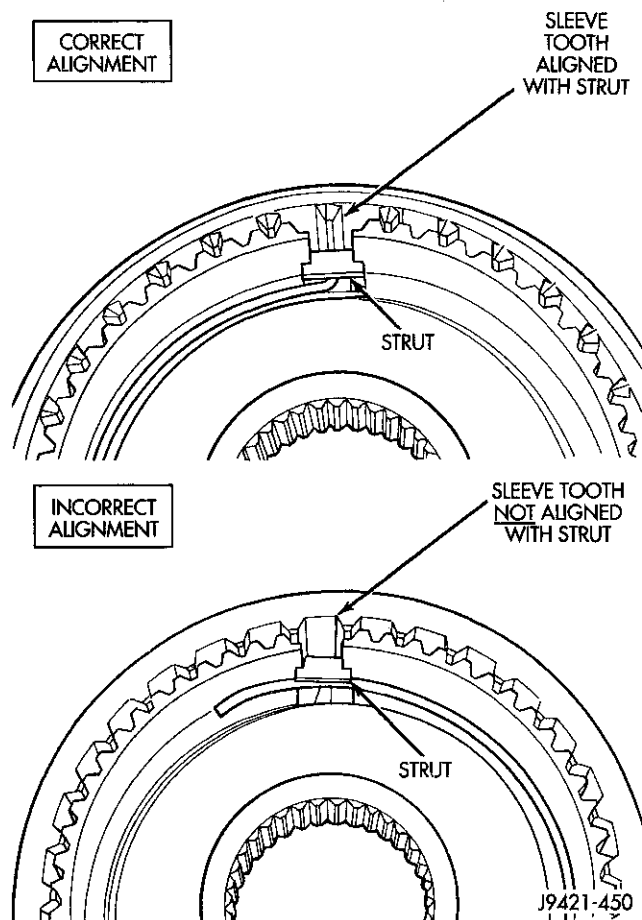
Correct Alignment Of Struts And Sliding Clutch
